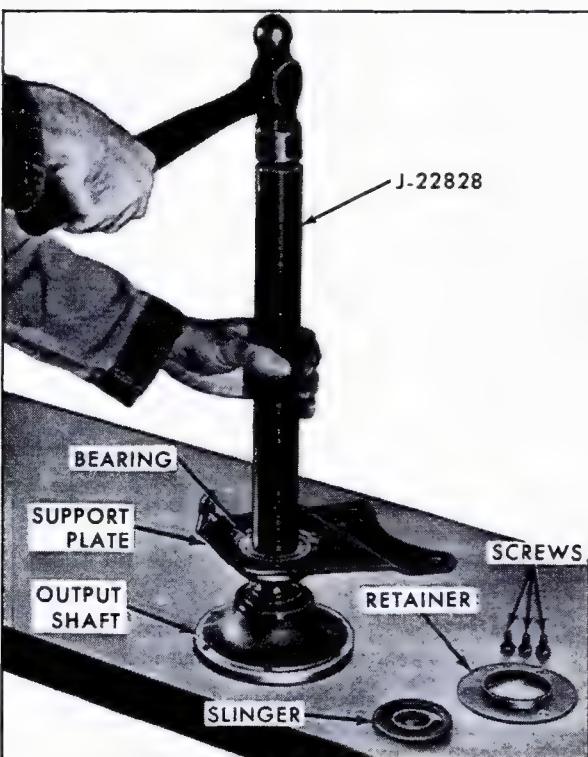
Installing Right Hand Output Shaft Support and Bearing
